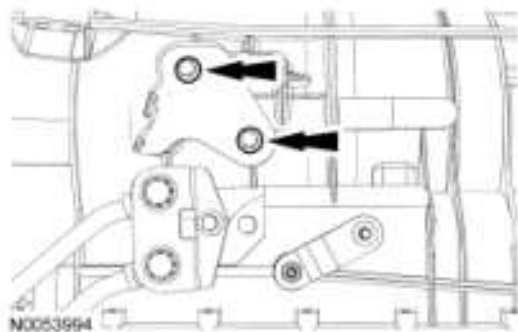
Locating Transmission Support Crossmember Nuts And Bolts
